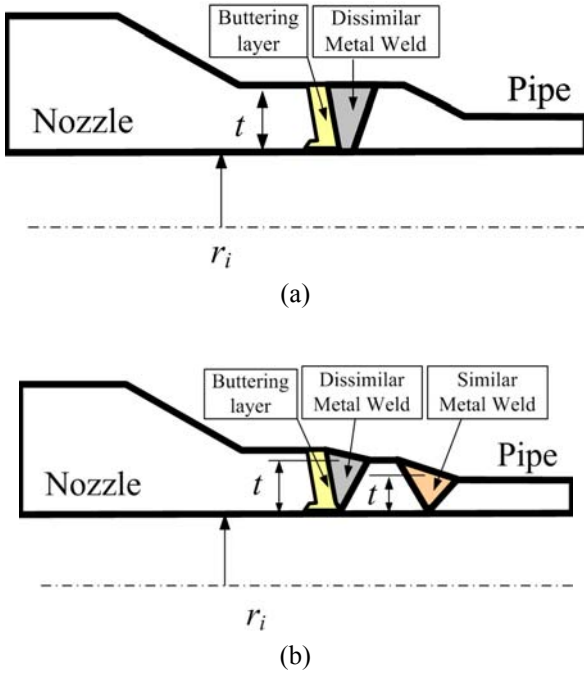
Typical configuration of nozzle-pipe joint. (a) nozzle welded to pipe without safe end and (b) nozzle welded to pipe through safe end
